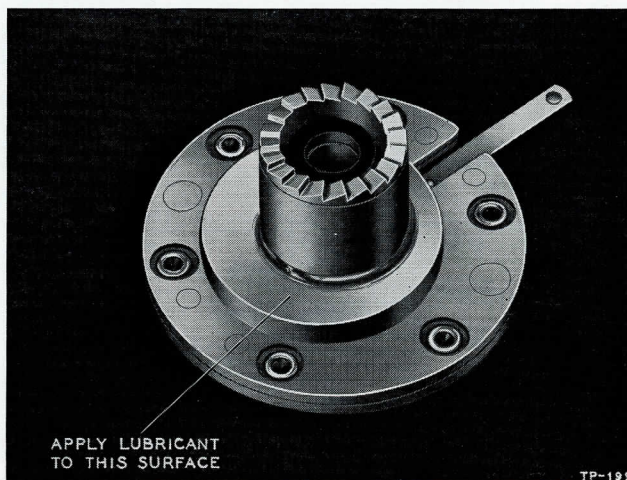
LUBRICATION OF TURNTABLE CAM
